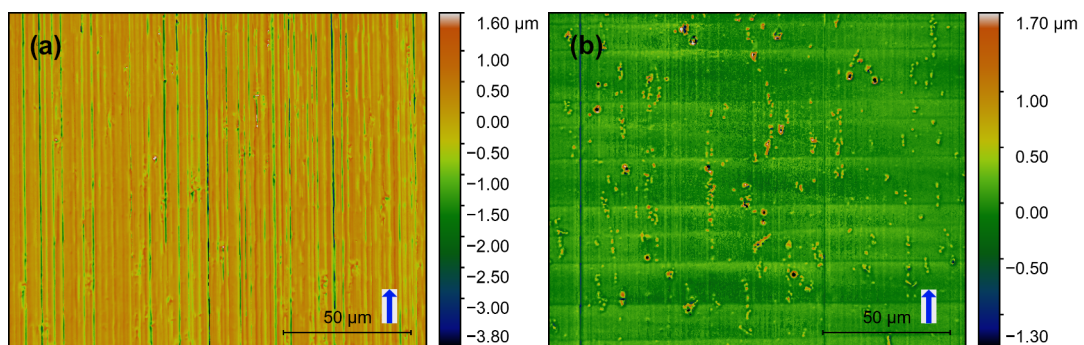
Confocal microscopy images of AA6082 surfaces milled with $f_z = 14 \mu\text{m}$: (a) SC-tool, (b) MD-tool.
